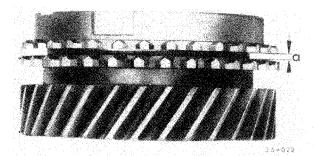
Synchronizer rings 3rd/4th gears, checking
